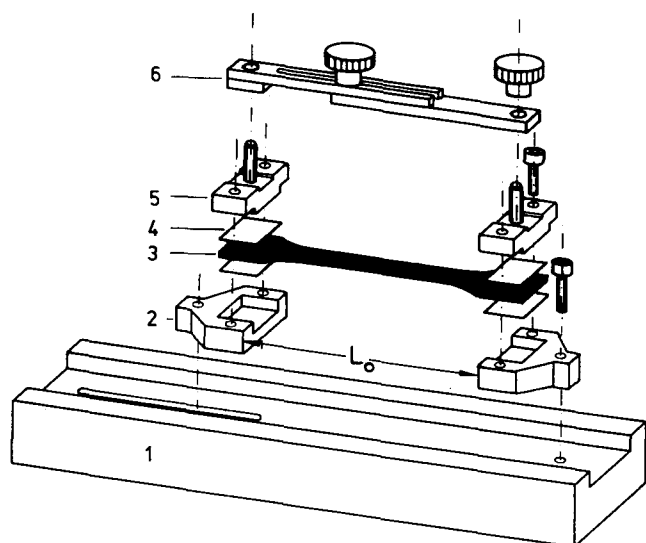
Device to attach a gel sample to the clamps of the apparatus shown in Figure 2: 1, aluminium frame; 2, 5, clamps; 3, gel sample; 4, thin Pertinax plates; 6, distance holder, which is removed after positioning the gel sample in the stress-strain apparatus. A torque wrench is used to adjust the pressure exerted by the clamps
